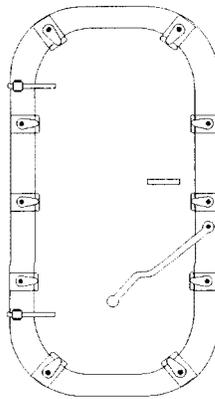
Glass-Reinforced Plastic Quick-Acting Watertight Door
